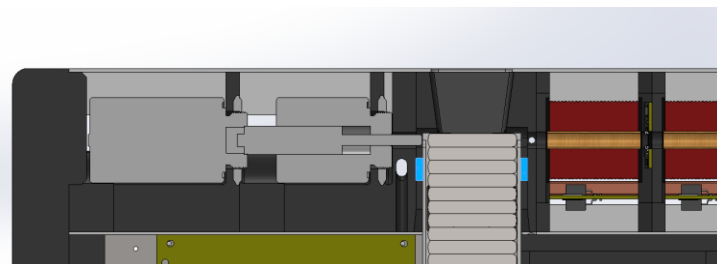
Injector assembly. Bore extends rightward. Magazine upper ring in blue.
